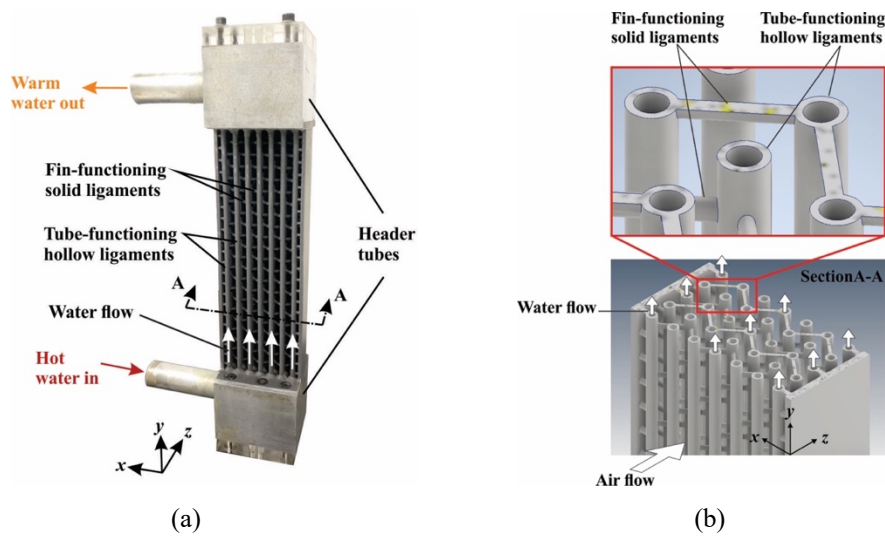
Lattice porous heater core: (a) Assembled core with header tubes, (b) Cut-away view in the x - z plane (A-A).
